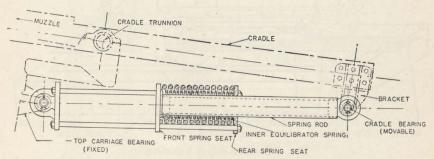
Equilibrator on 105-mm. Howitzer Mount M1.
